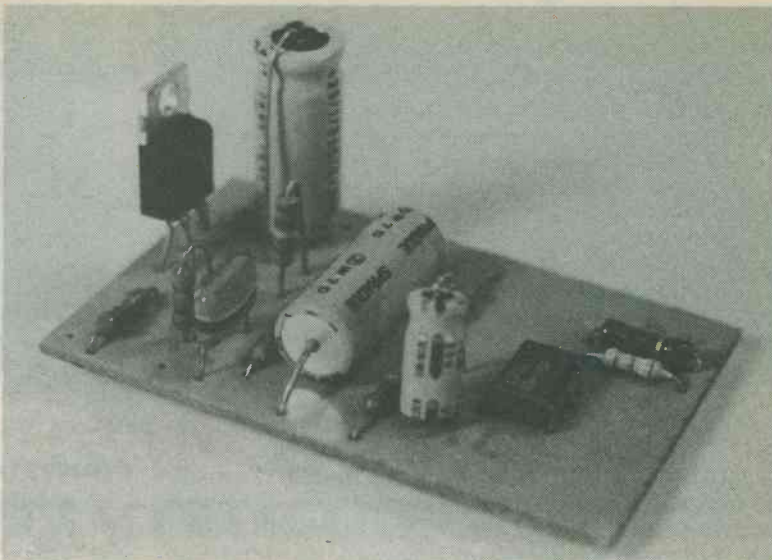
The alarm generator is assembled on a small printed circuit board. The heatsink surface of IC2 is just slightly outside the left hand edge of the board.
